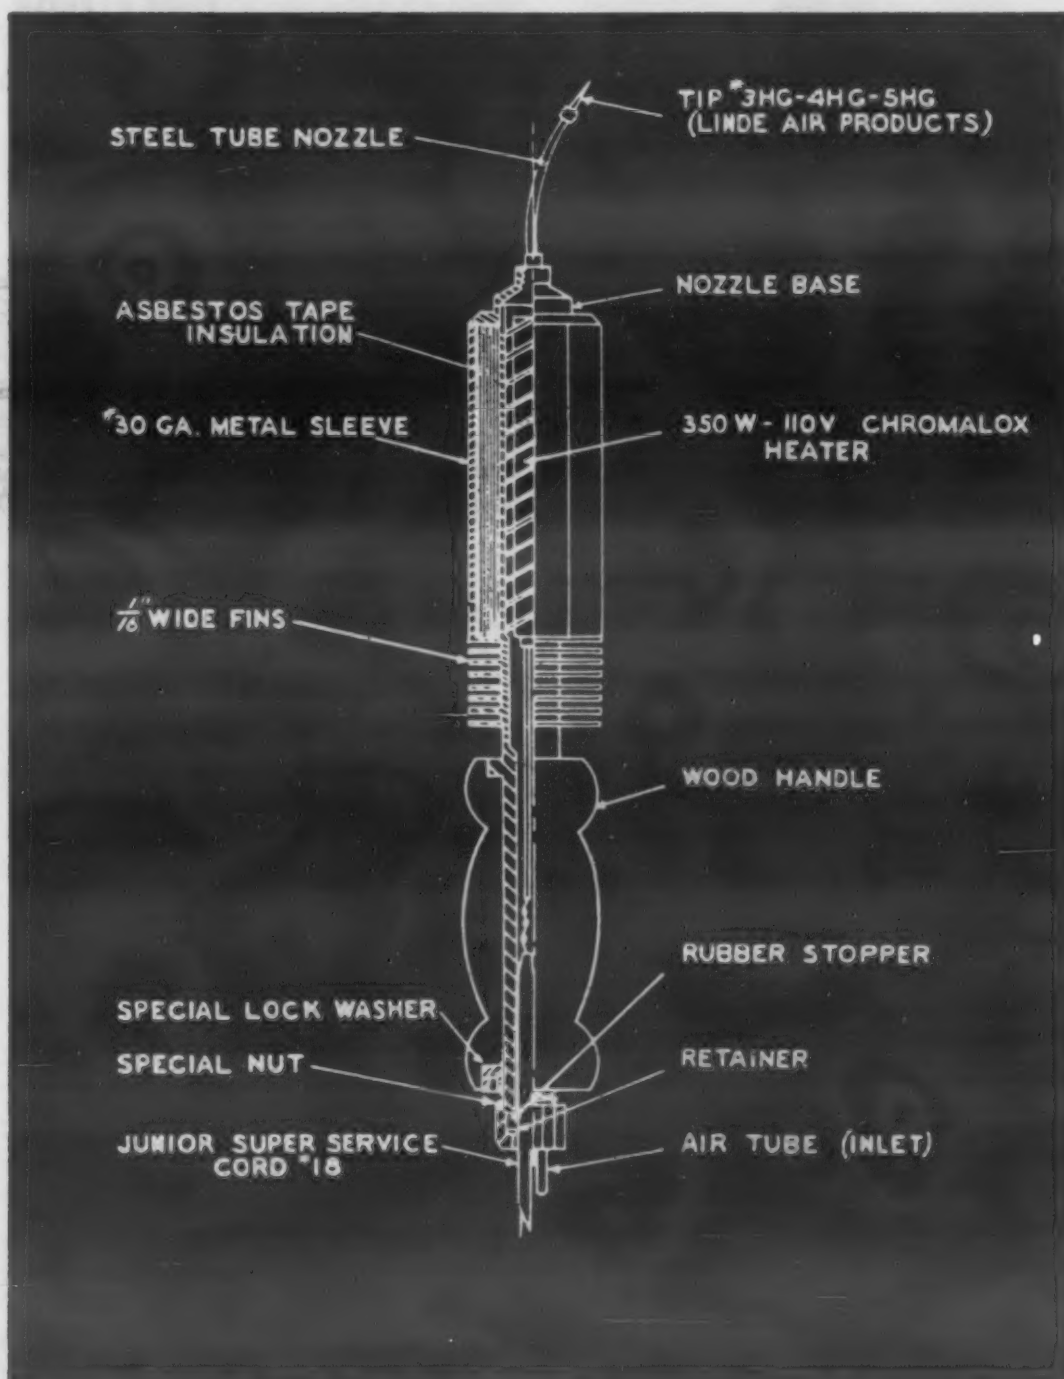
This hot air plastic welding torch resembles the torch used for welding metals, except that it directs heated gases, instead of a flame, against the work. (All illustrations courtesy The Dow Chemical Co.)
